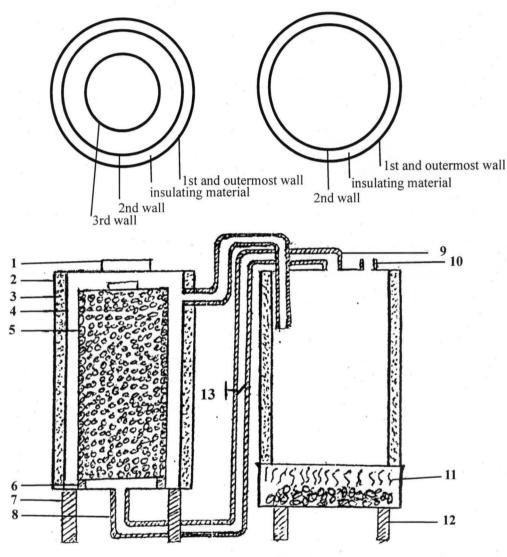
ASSEMBLED MACHINE (PICTORIAL VIEW)
